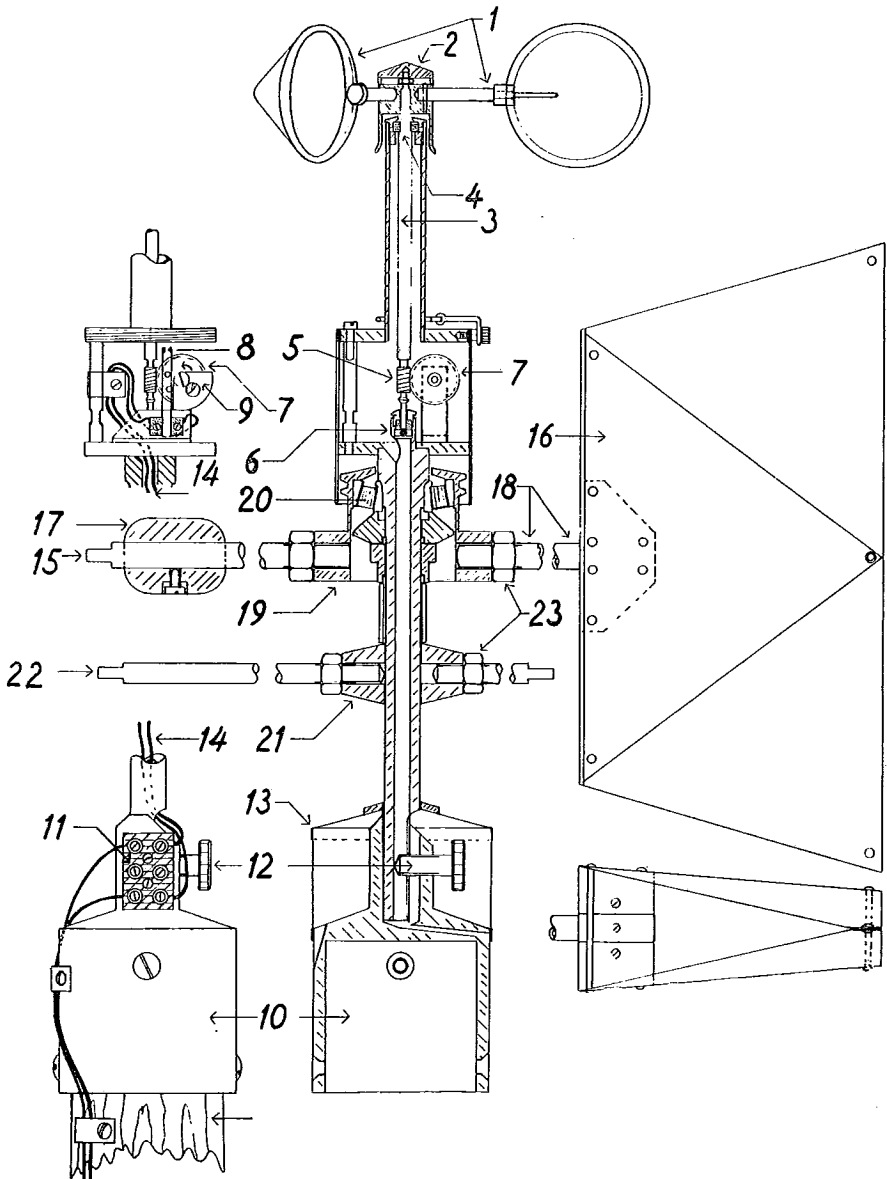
A sectional view of the anemometer of Fig. 1. Scale 1 : 3
